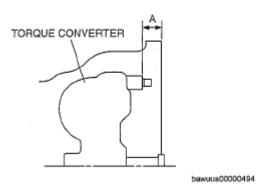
Measuring Distance A Between End Of Torque Converter And End Of Converter Housing
